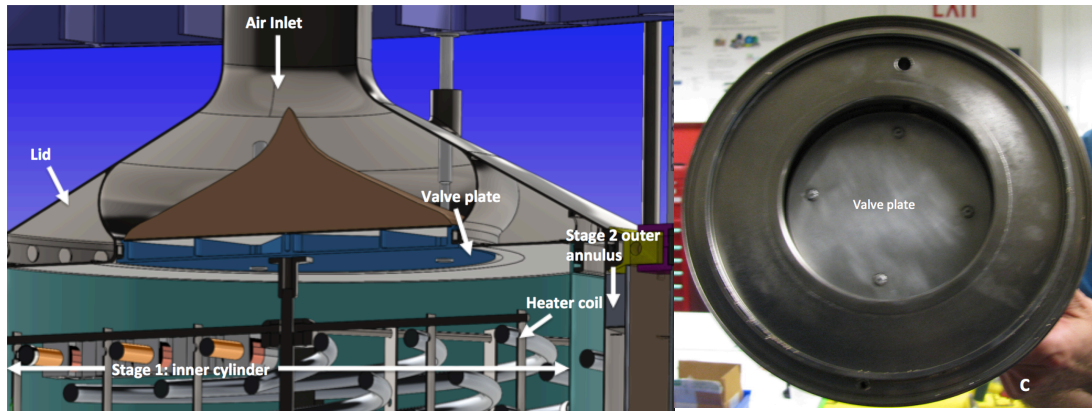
(left) SolidWork model cross section showing the valve plate; (right) a picture of the fabricated lid with the valve plate in the middle
